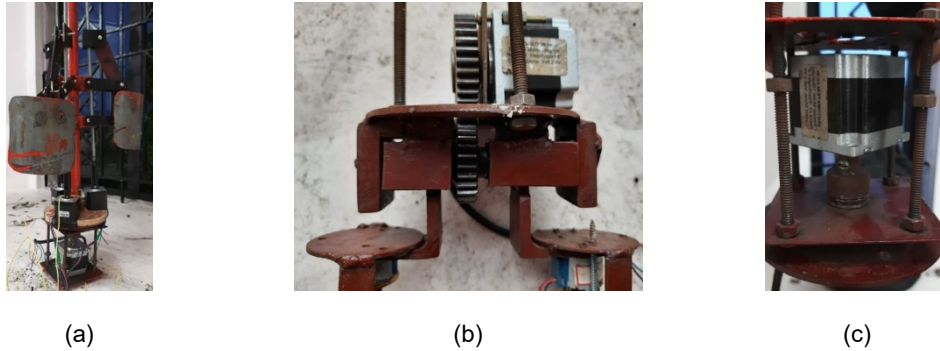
Fabricated prototype of the mechanisms: (a) Anchor deployment (b) Gripper actuation and control (c) Rotation (see online version for colors)
